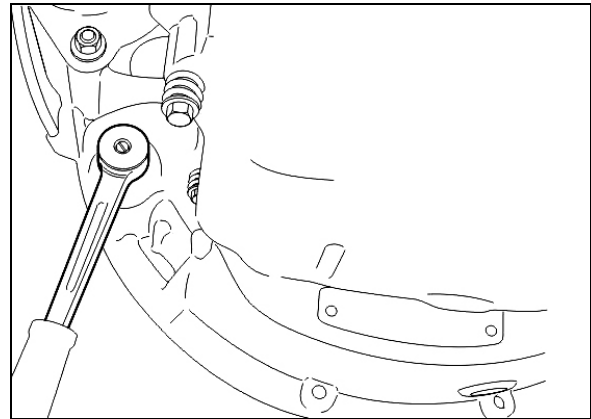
VOLVO ENGINE CRANKING POSITION
